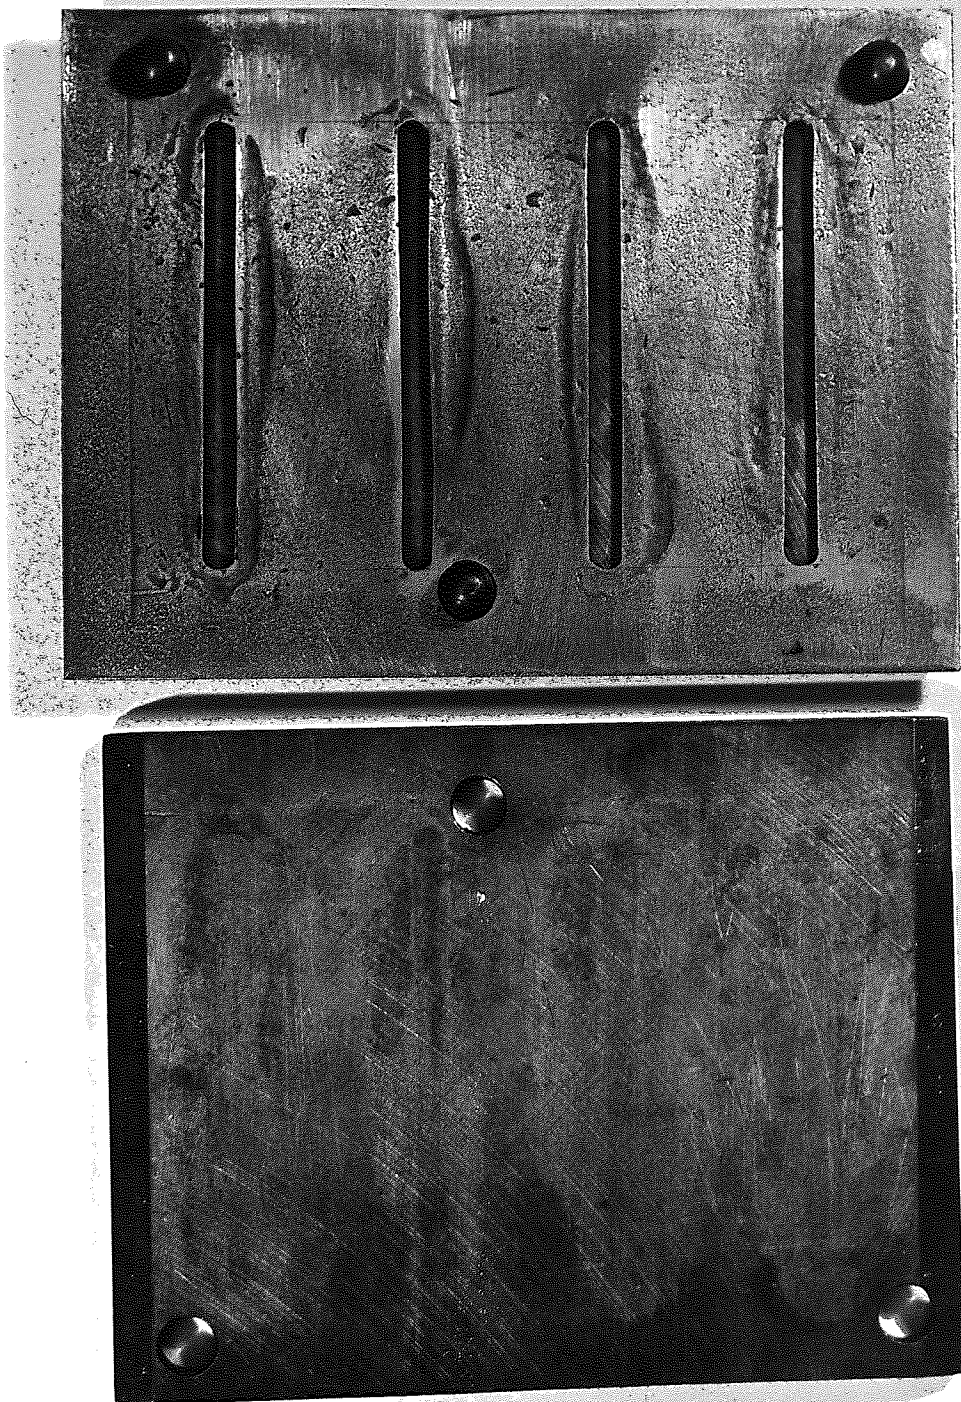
The mould used when producing specimens from friction material components (shown with the top plate removed)
